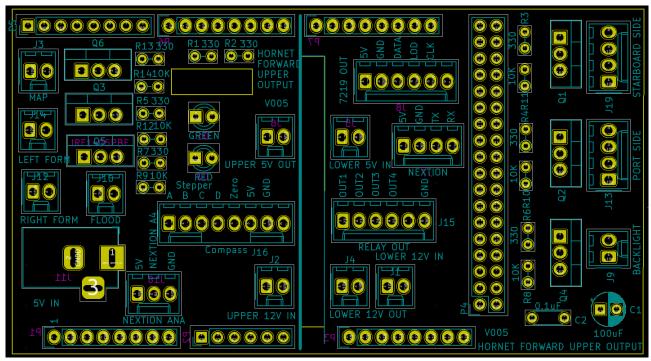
Hornet Forward Output Upper Shield - PCB Layout
